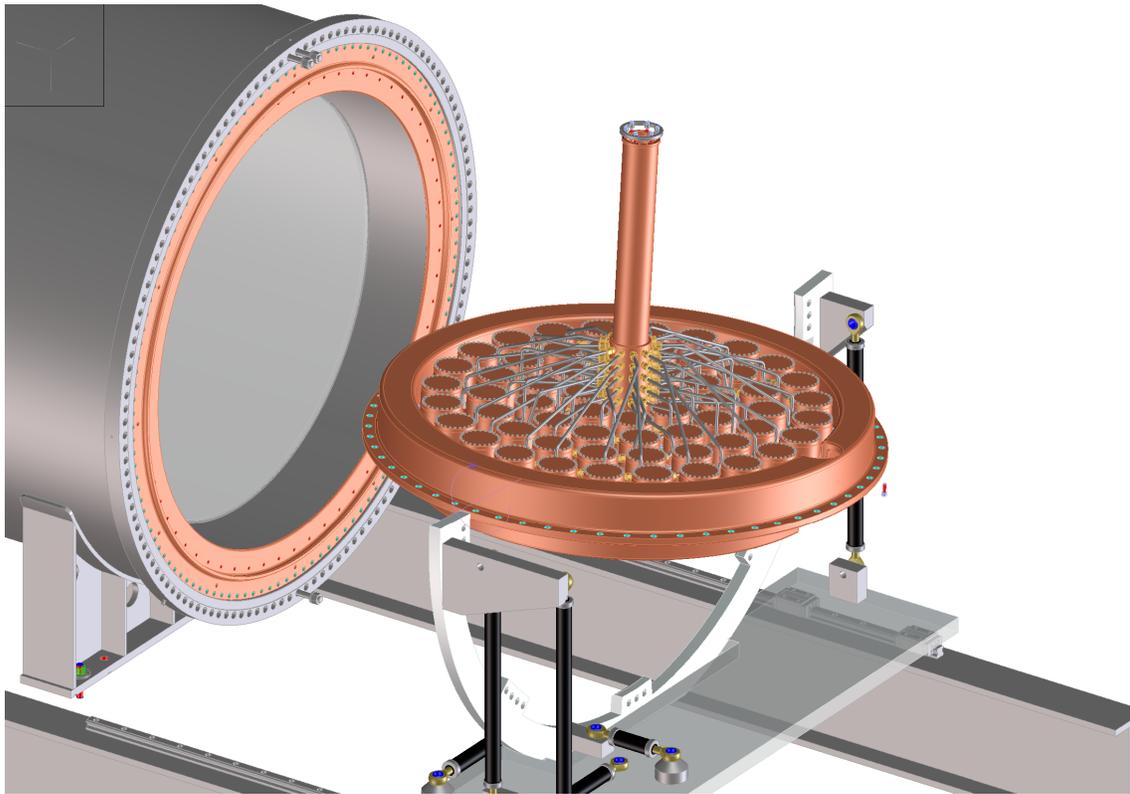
Hexapod Support Fixture, Attached to Carrier Plate
